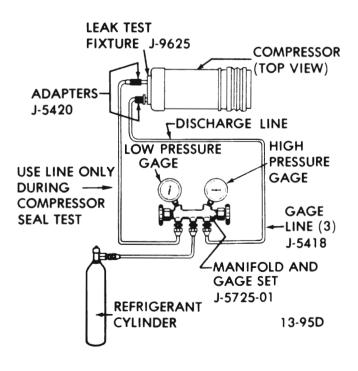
Leak Testing Shaft Seal and Seal Seat O Ring
